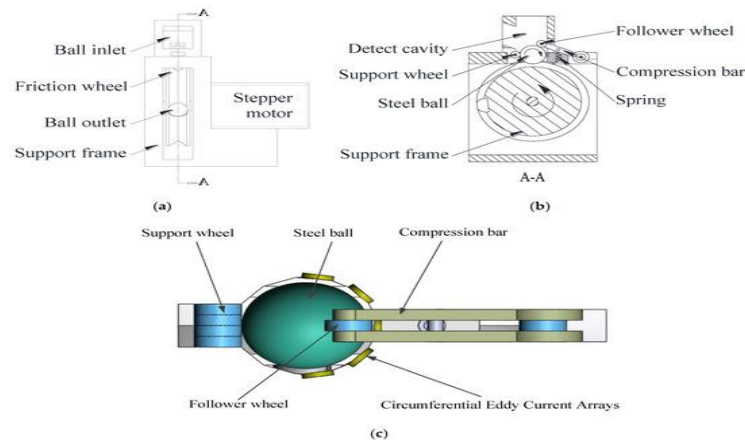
The unfolding mechanism of the steel ball. (a) The main view of the unfolding mechanism; (b) The cutaway view of the unfolding mechanism; (c) The top view of the unfolding mechanism [21].
